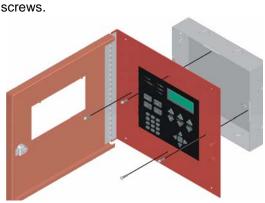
Attaching Annunciator/Door Assembly to Backbox
